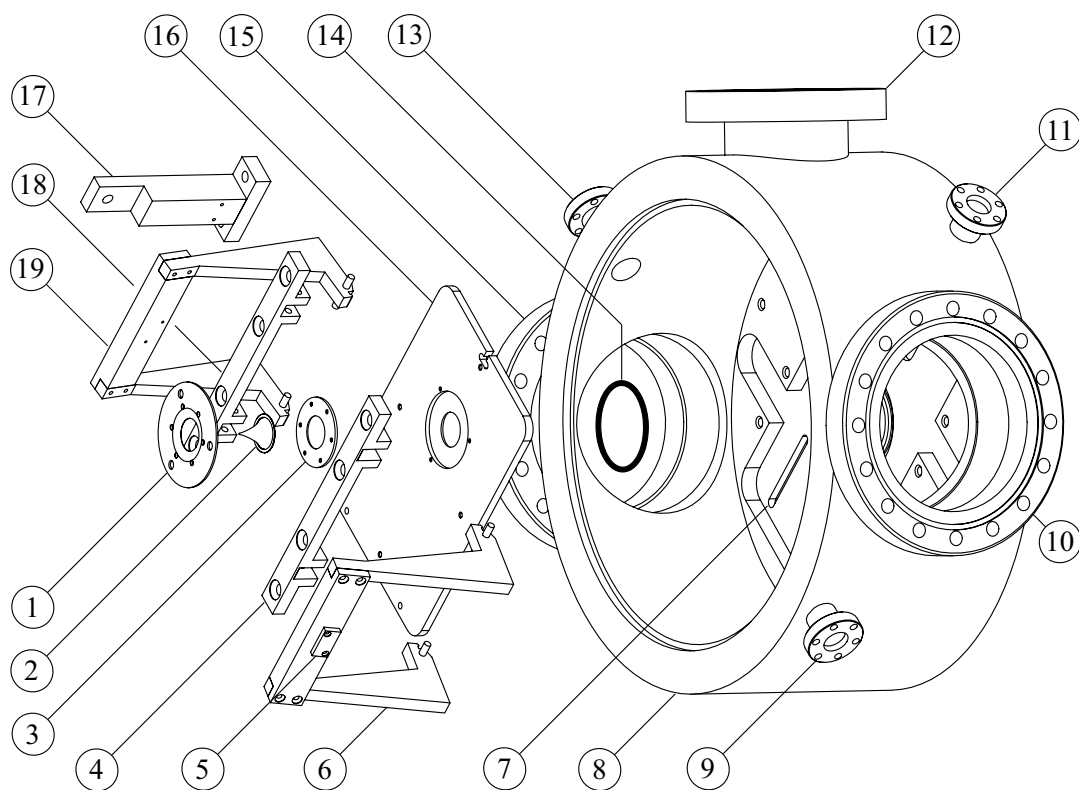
Explosion drawing of the home-built gate valve integrated in a CF 250 flange. The individual parts are: (1) upper skimmer mount, (2) skimmer, (3) lower skimmer mount, (4, 18) shaft holders, (5) hardened steel plate, (6, 19) lever arms, (7) slots for alignment pins, (8) chamber flange (CF 250), (9, 11, 13) CF 16 flanges, (10, 15) CF 100 flanges, (12) CF 63 flange, (14) Viton O-ring, (16) sledge, and (17) linear motion feedthrough guide.
